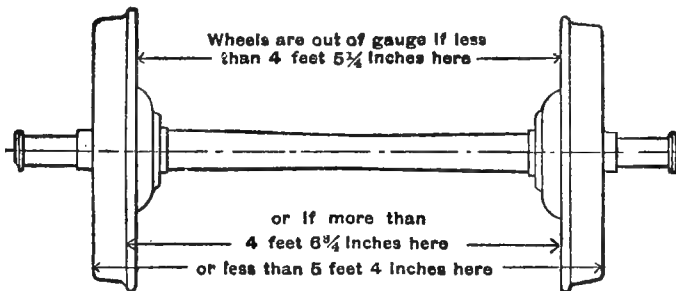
MEASUREMENTS TO BE MADE AT THE SAME HEIGHT ON THE WHEELS AS THE CENTER OF THE AXLE. FOR WHEELS CAST PRIOR TO THE M. C. B. STANDARD TREAD AND FLANGE ADOPTED IN 1907.
